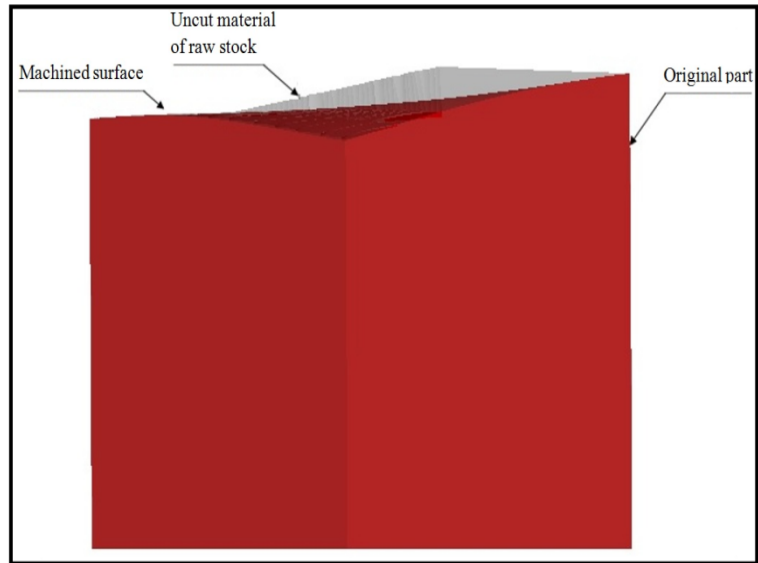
Visual verification of part 1 using 5-axis machining simulation.
